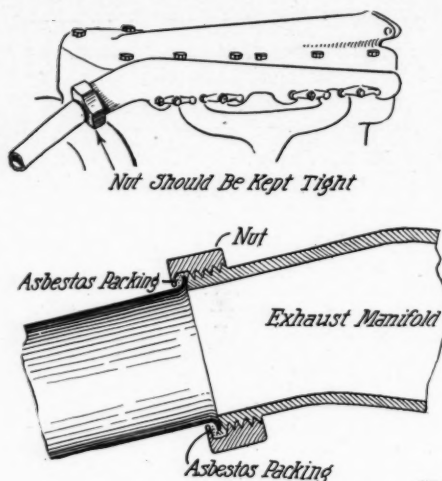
Showing conventional method of connecting exhaust pipe to manifold. The packing must be tight to prevent leakage and disagreeable noise
